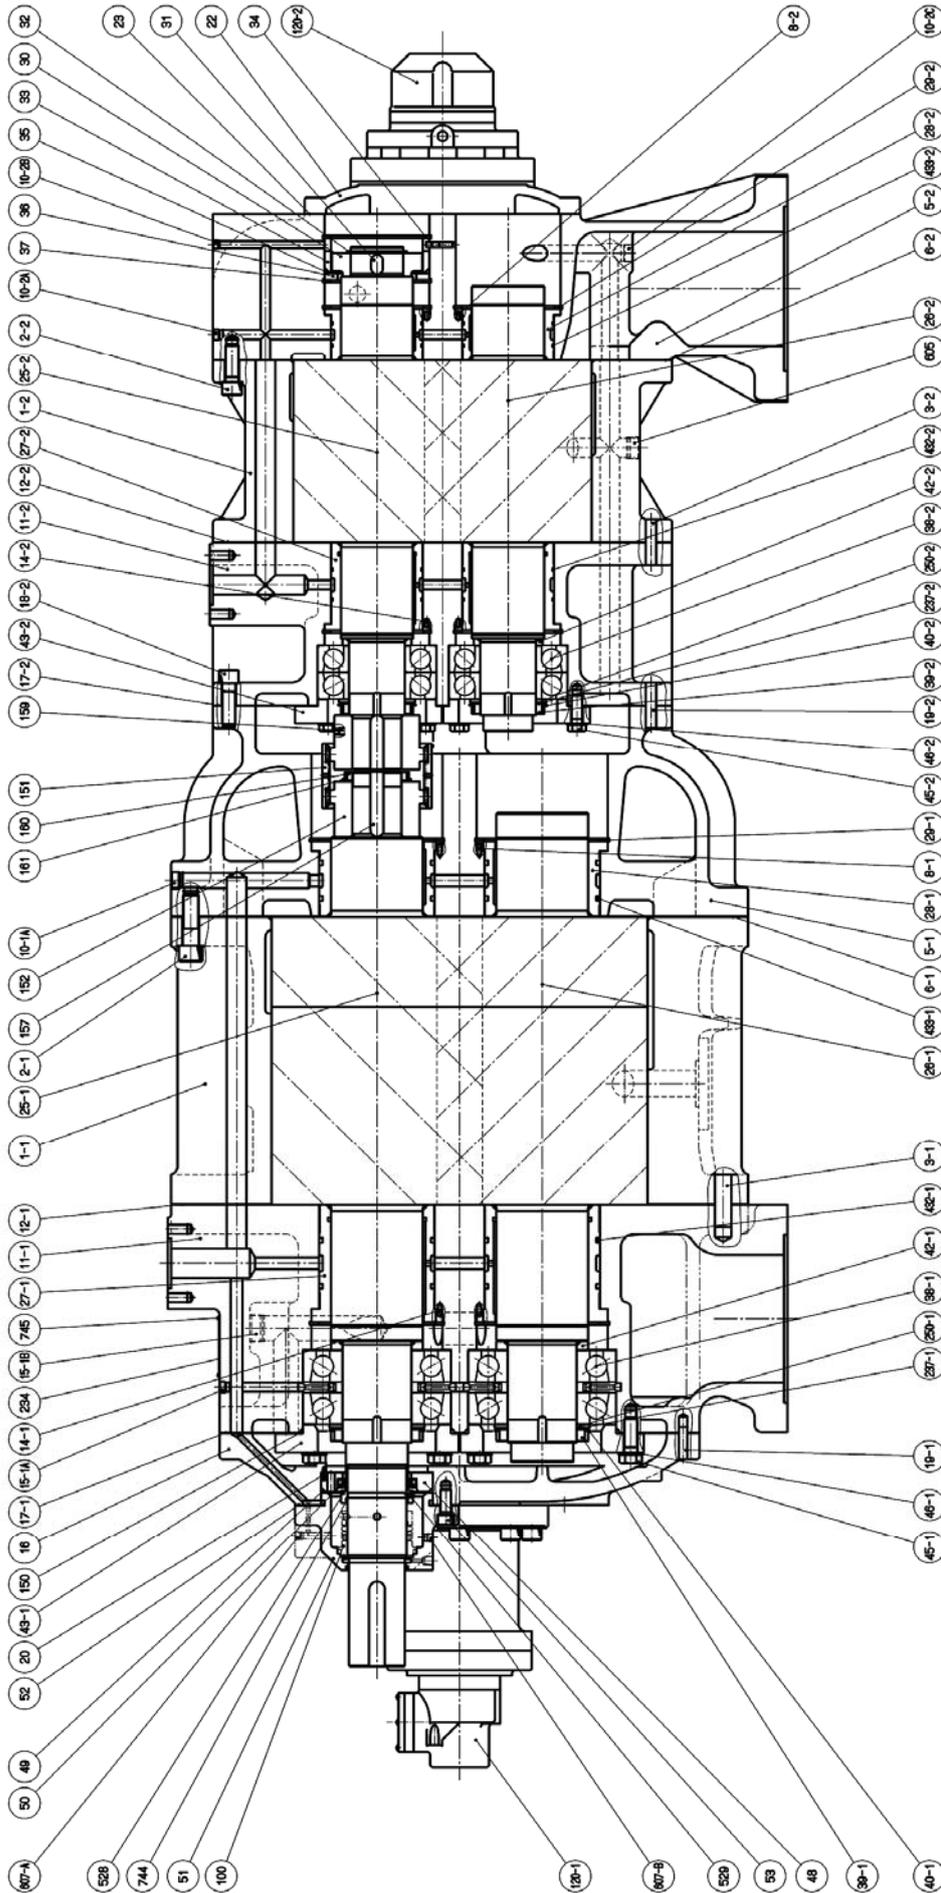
3225MSC Assembly Sectional View (Horizontal)
